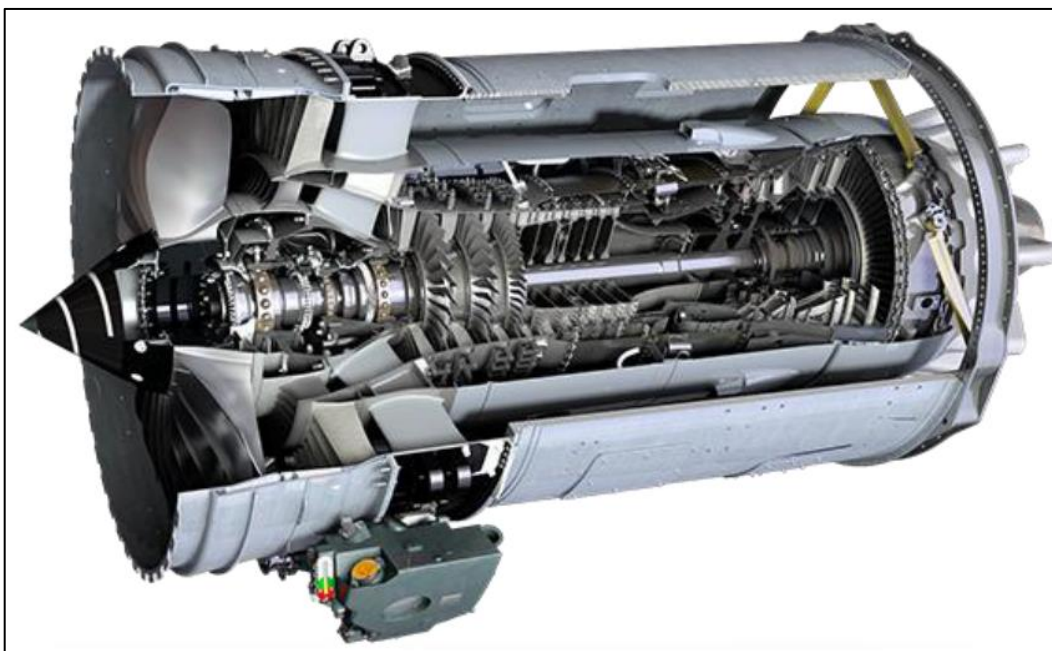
Cutaway view of BR725 engine (*Engine Manufacturer*)
